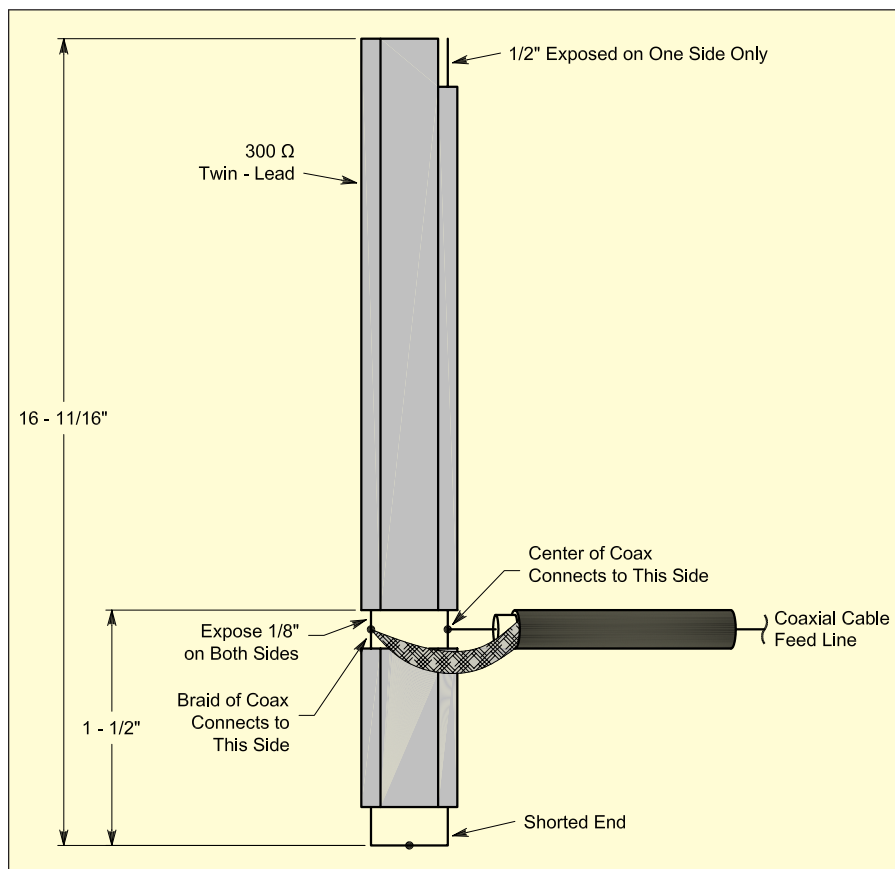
The matching section for the dual-band collinear is constructed of 300 Ω twin-lead. The coaxial feed line connects directly to it.
